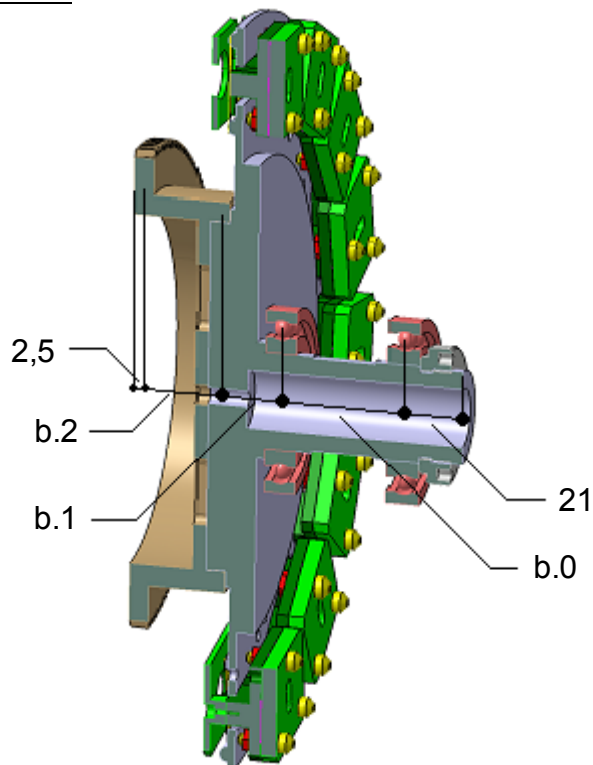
Dimensions of the wheel to calculate the acting forces.
